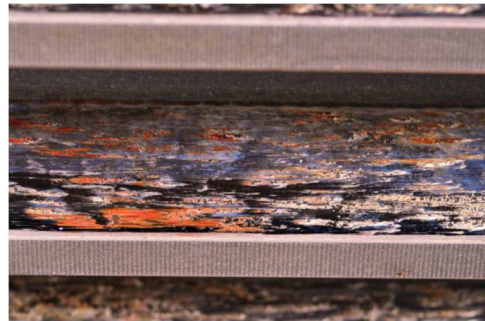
Corrosive wear (fretting corrosion)
